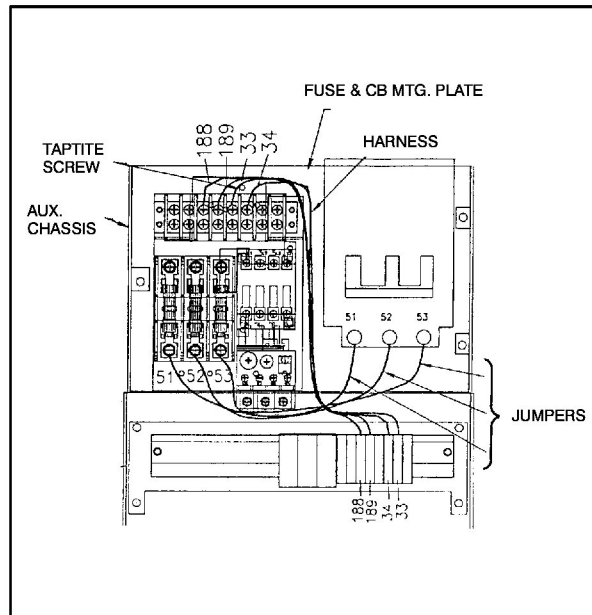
MinPak Plus with Blower Motor Starter Kit
